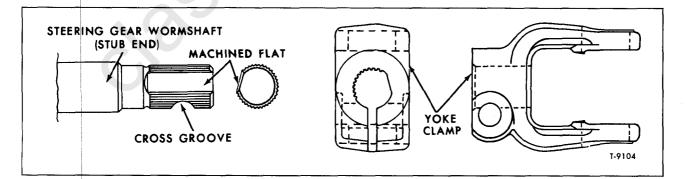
Steering Gear Wormshaft (Stub End) and Intermediate Shaft Yoke and Clamp
